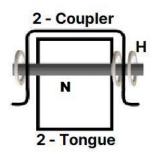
To prevent pinching the coupler mechanism while tightening, use and extra 19m flat washer (H) threaded onto the 3" bolt (N), between the tongue (2) and the coupler (2).
